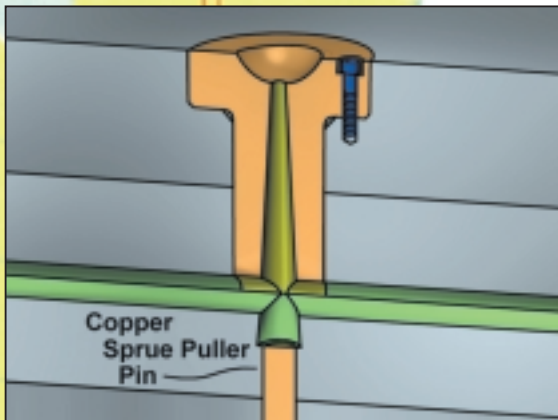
Illustration E: Copper alloy sprue puller pin used to firm up puller and reduce molding cycles.
